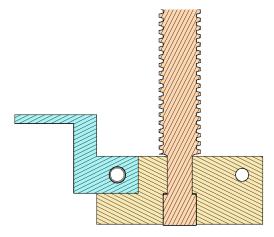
Acme Lead Screw and Collet Sub Assembly Cross Section
